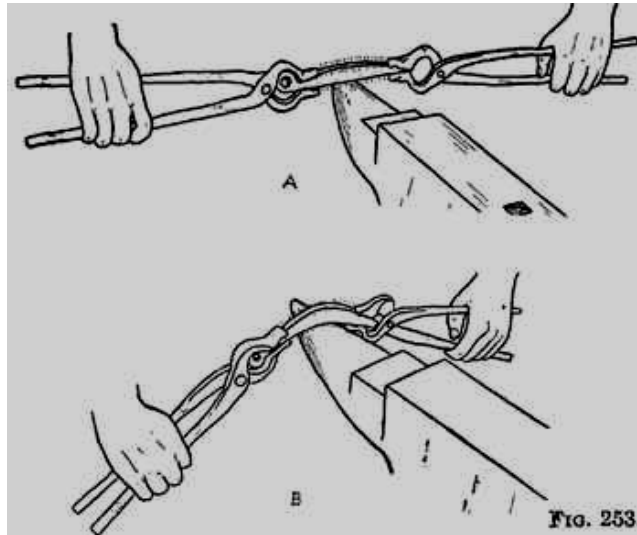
Flat iron may be bent edgewise by heating to nearly a white heat and bending slowly with tongs. This method is good in making flat chain hooks.
